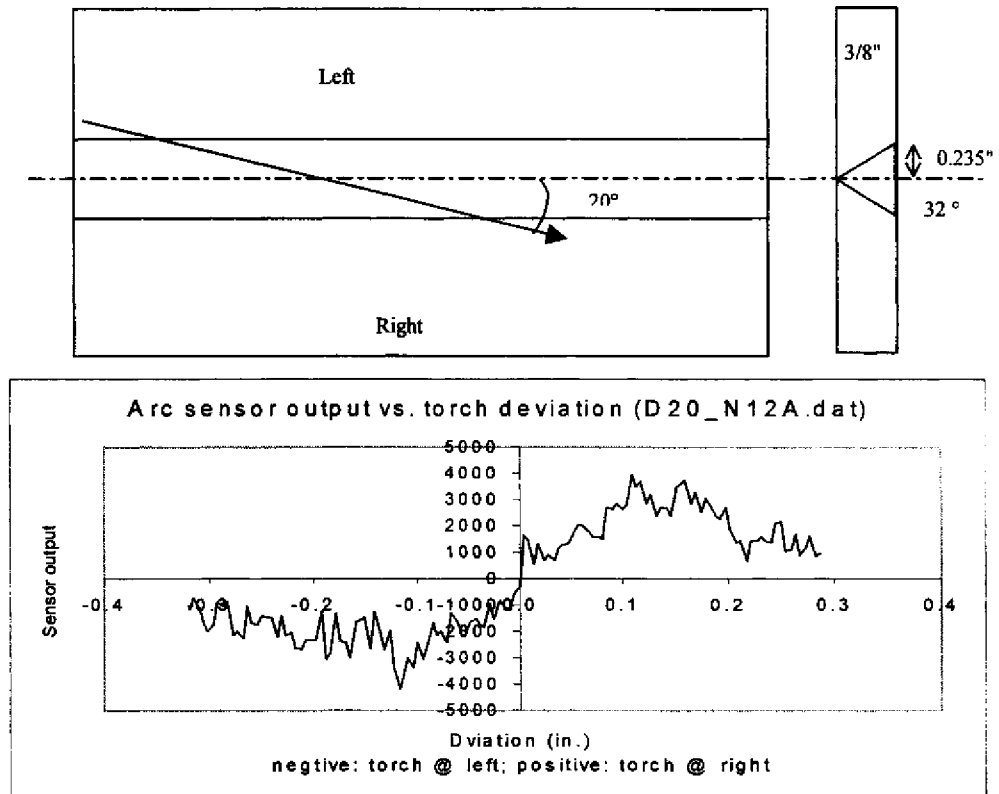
Arc sensor output when welding on V-groove joint (a) setting, (b) data
